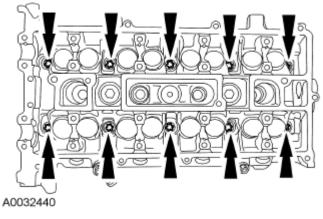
Locating Cylinder Head Bolts Courtesy of FORD MOTOR CO.
